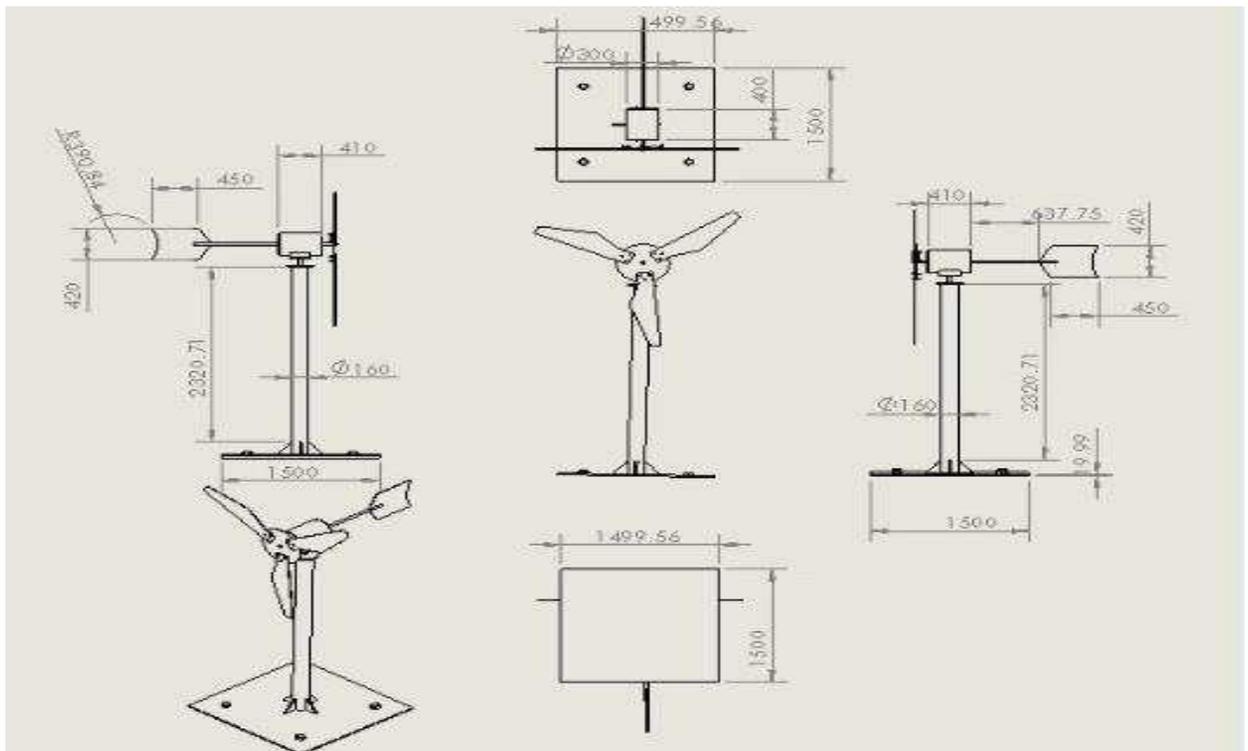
Dimensioned view of Horizontal Wind Turbine
